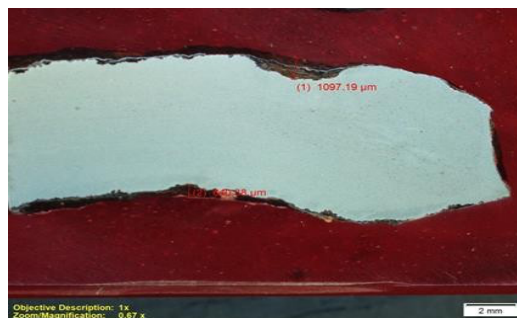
Macro photo of spring etching A fracture surface with a longitudinal cut
